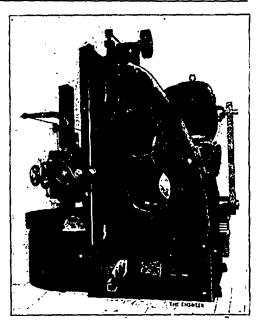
51-inch Boring Mill Driven by a C-W Form I Motor with MV System.
